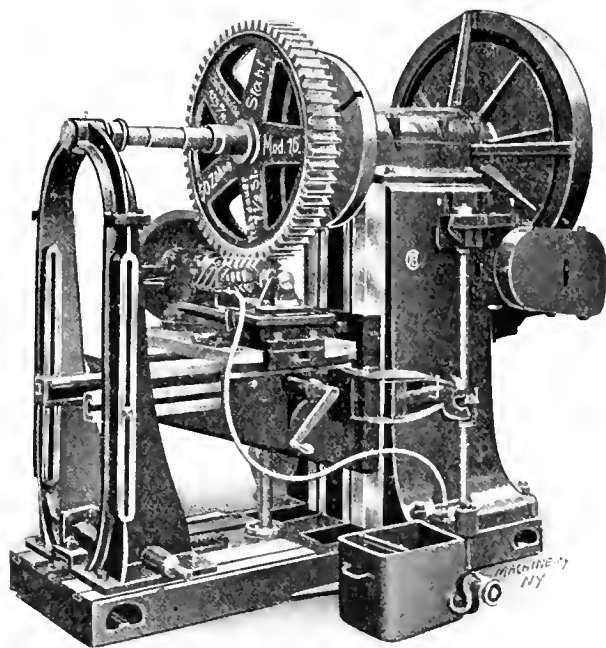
The Reinecker Spur Gear Hobbing Machine.
